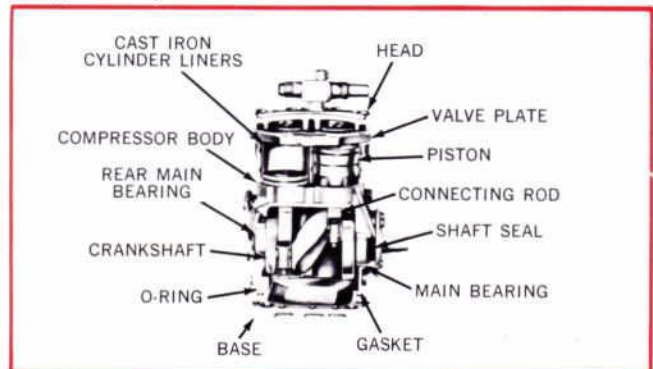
A Cutaway View of a Typical Compressor Used with Ford Products
